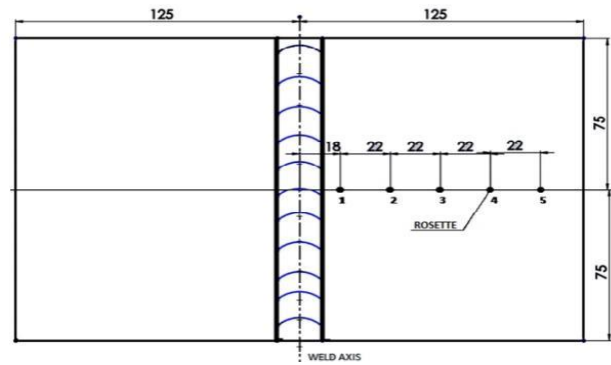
Strain gauges arrangement on weld plate[27]
